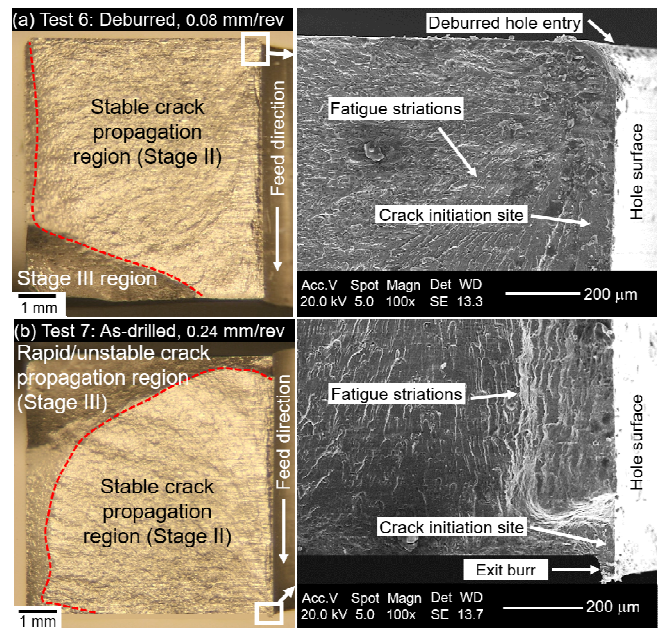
Selected optical and SEM micrographs of fractured surfaces on AA7010 fatigue specimens.
